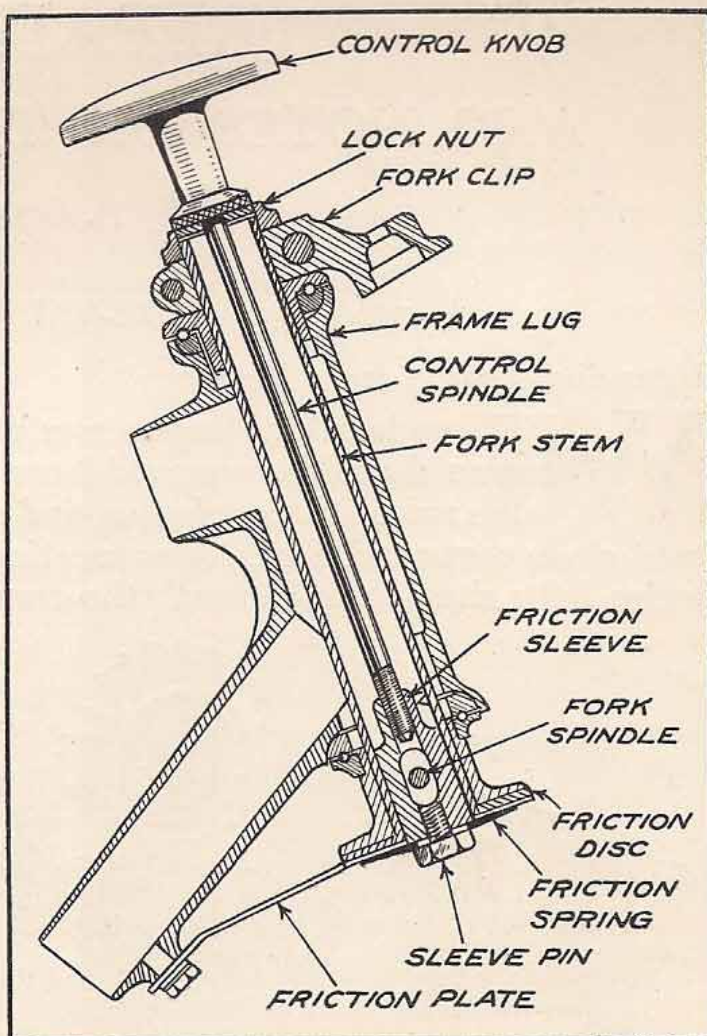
STEERING DAMPER ARRANGEMENT (1930-31).
